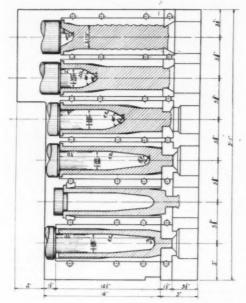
TOOLS FOR MAKING 90-MM UPSETTER FORGINGS
